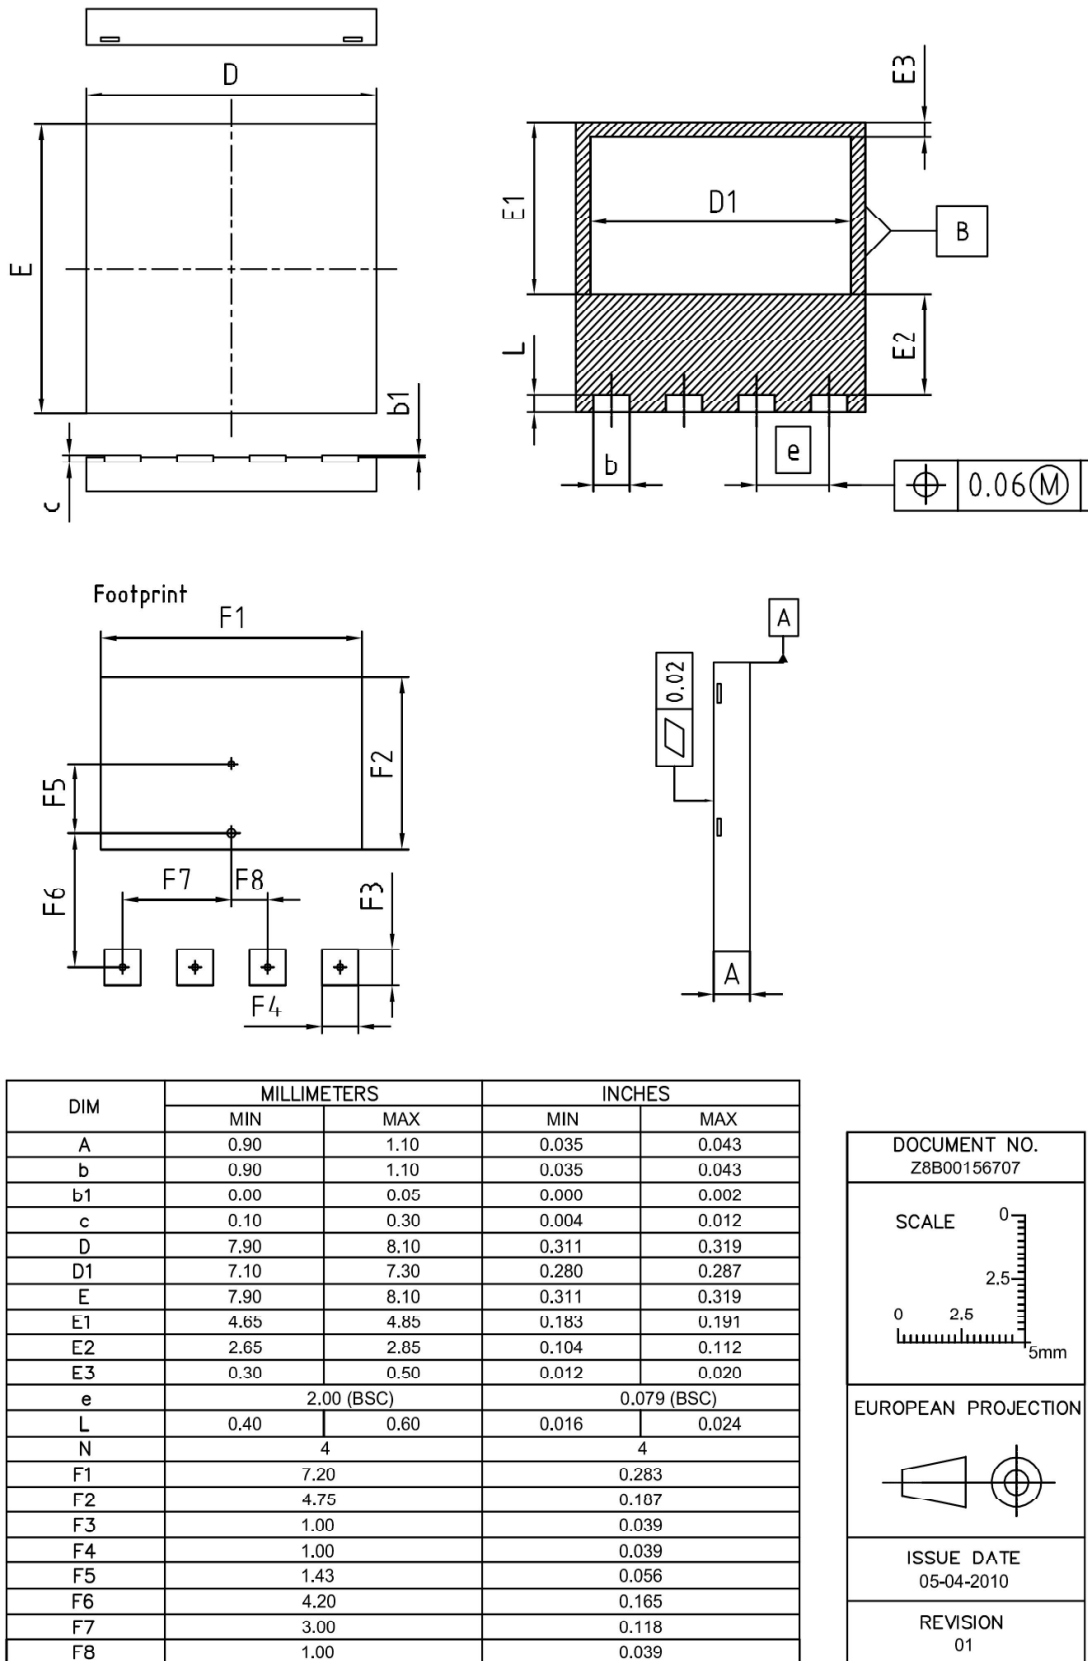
Outline PG-VSON-4, dimensions in mm/inches
